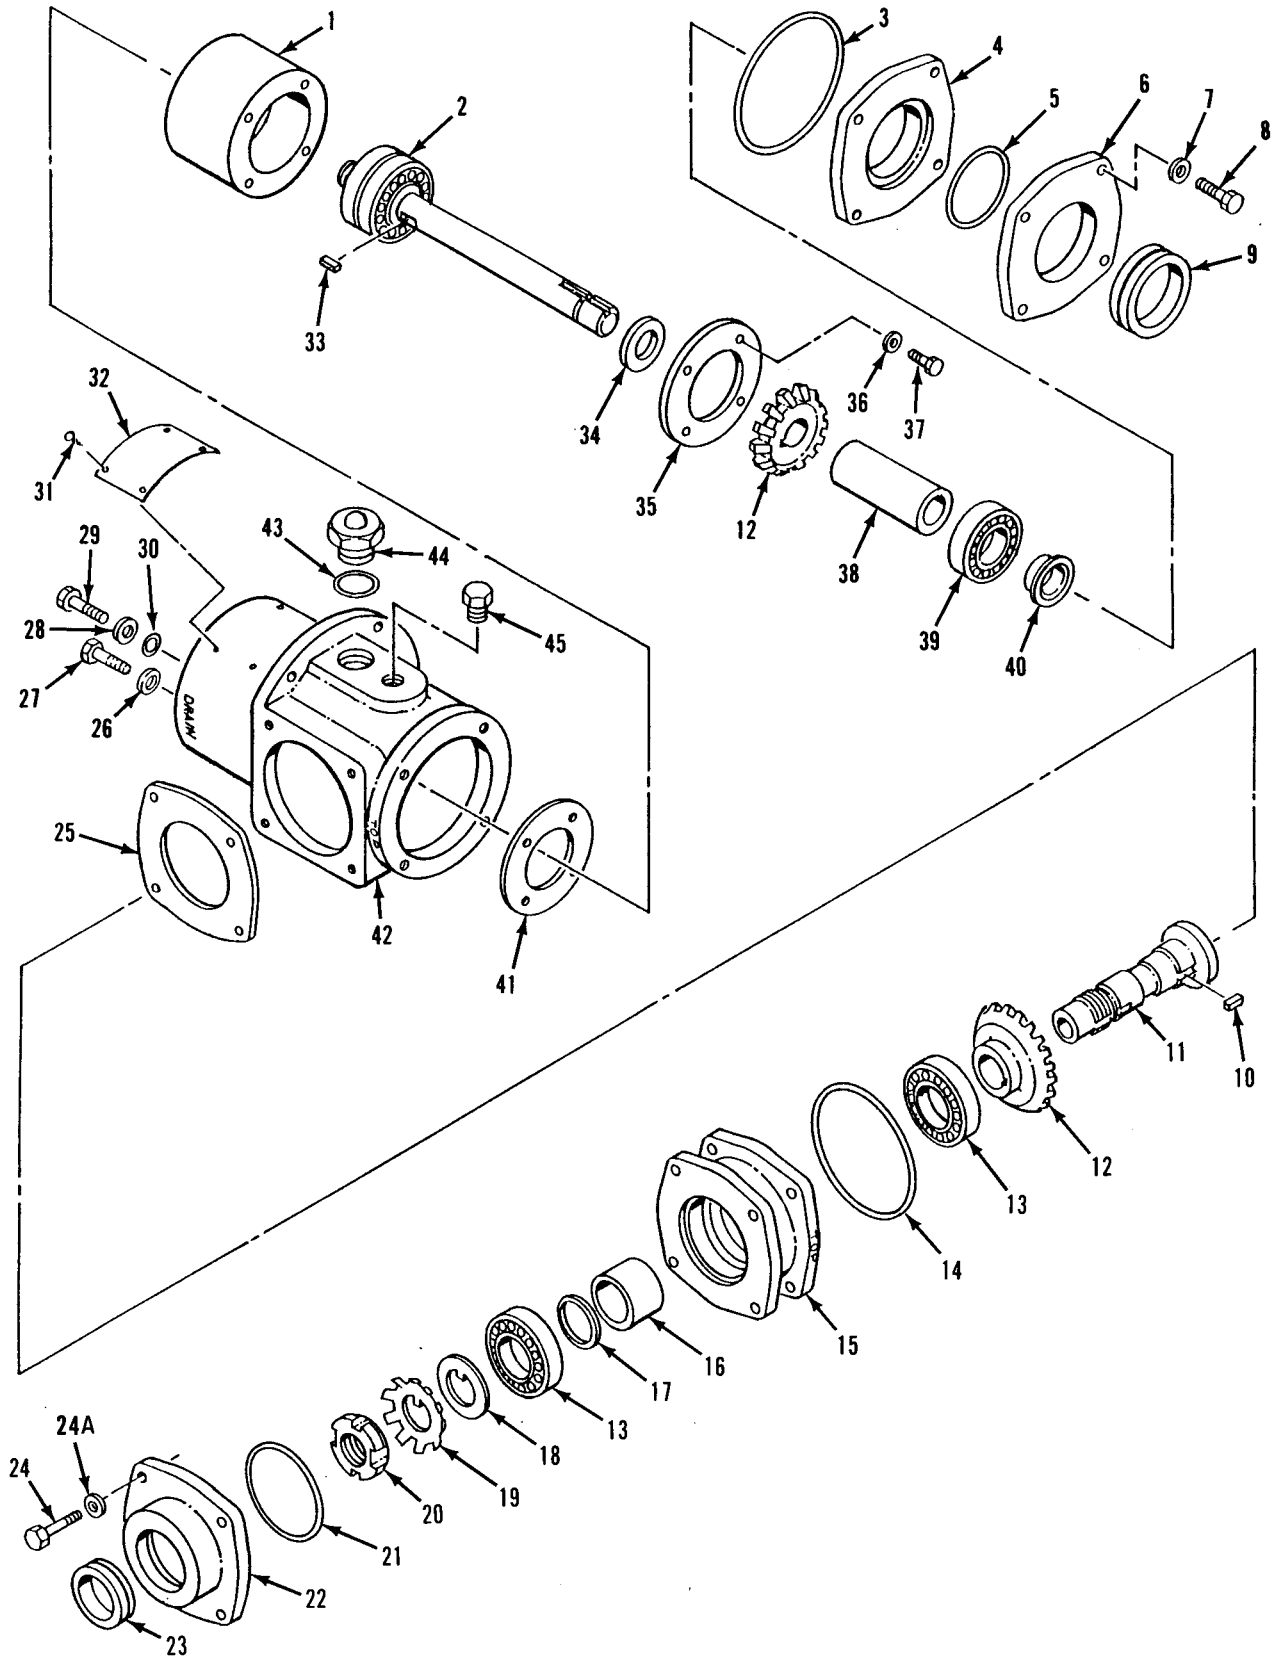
Right Angle Drive, Cooling Fan – 12349762-1
